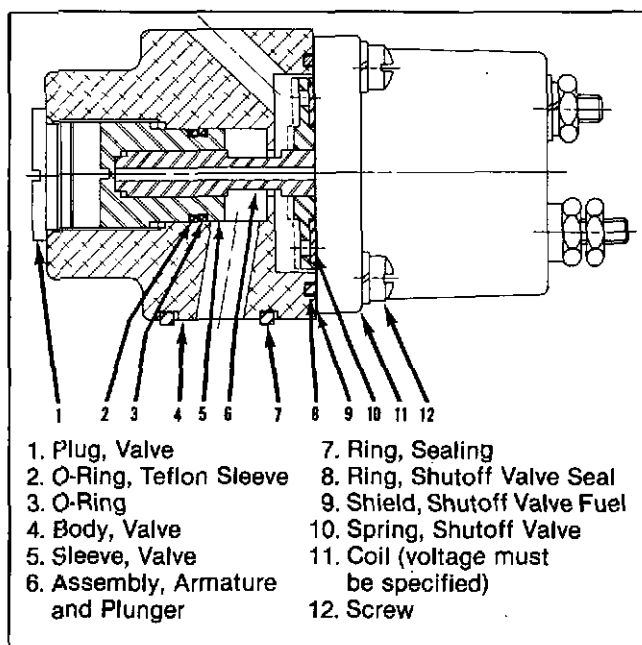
, (F5276). Dual valve assembly cross-section.
